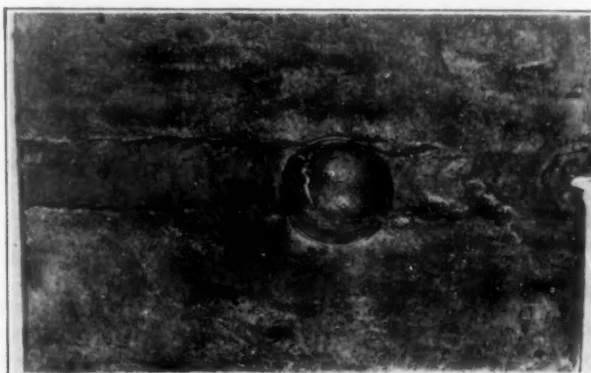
Weld Tested at 8,000 lbs.
